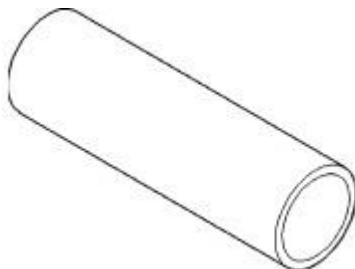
INSTALLER, CRANKSHAFT SEAL - 6780
